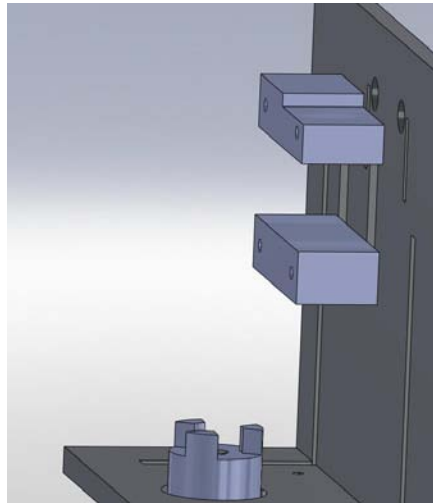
Flexible coupling hub mounting onto DC motor with keyway alignment
